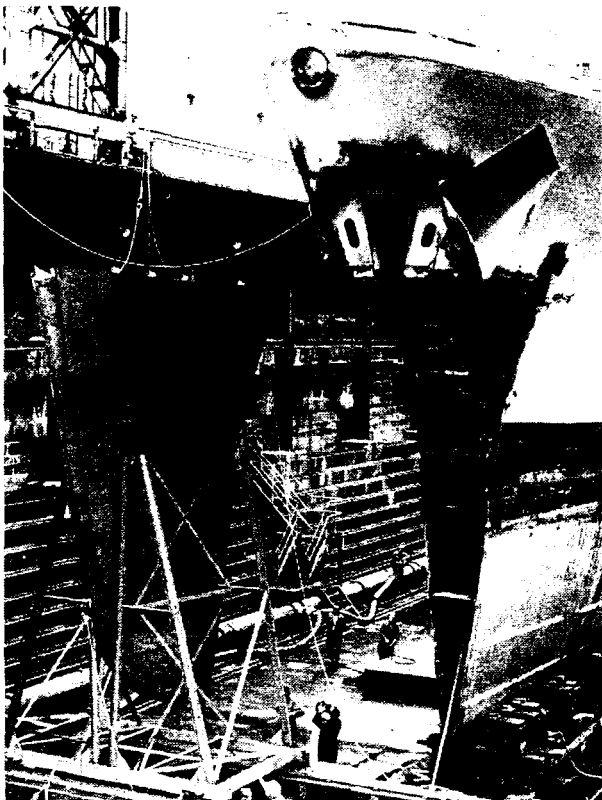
PHOTOGRAPH OF NEW BOW WELDMENT IN CRADLE
